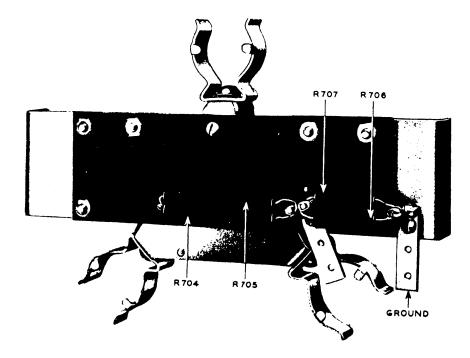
Dummy Load TS-234/UP, Resistor Mounting Assembly
